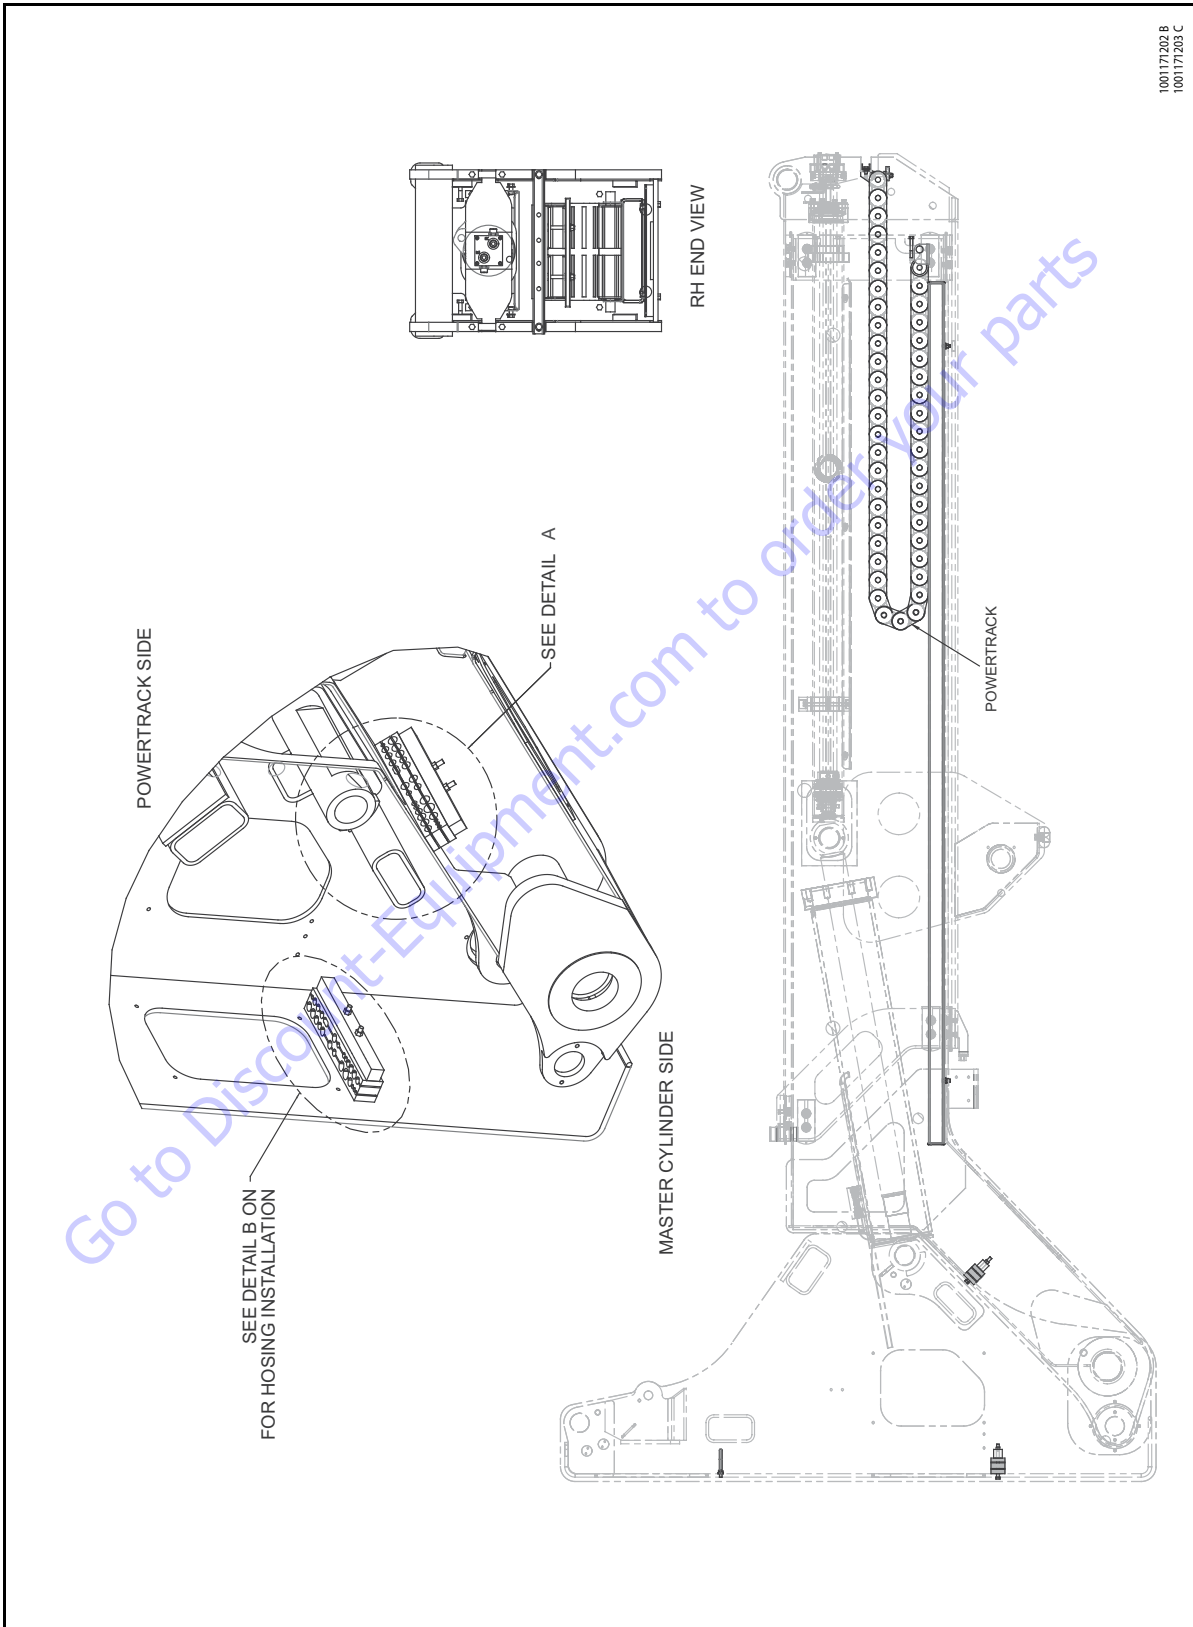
Powertrack Installation Tower Boom (Sheet 1 of 3)
